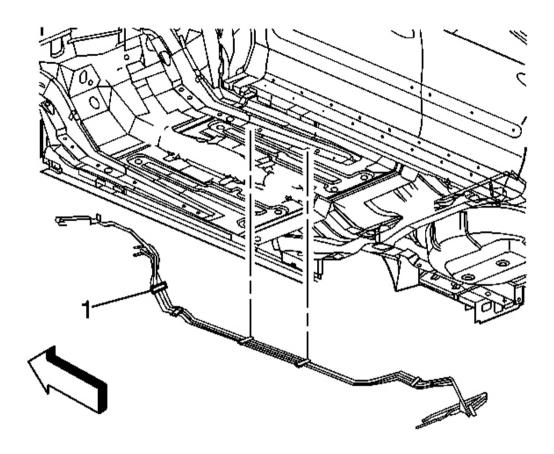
Fuel Pipe Assembly View Courtesy of GENERAL MOTORS CORP.
